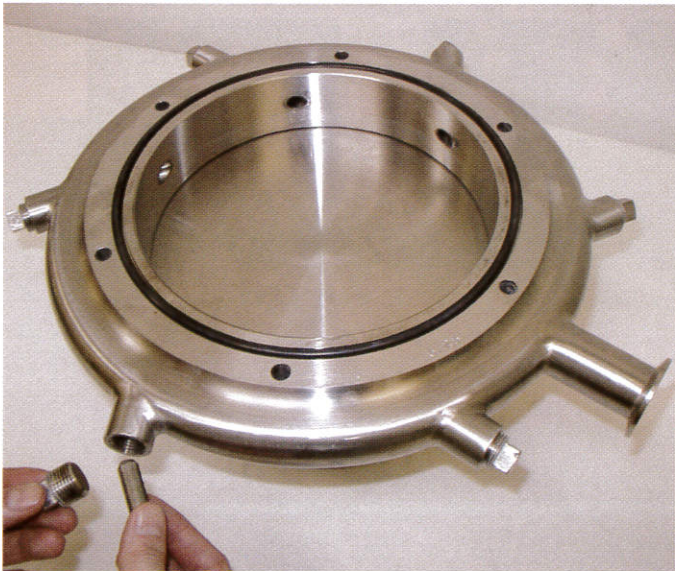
In a closed-manifold jet mill, the jet removal must be done through access ports.
